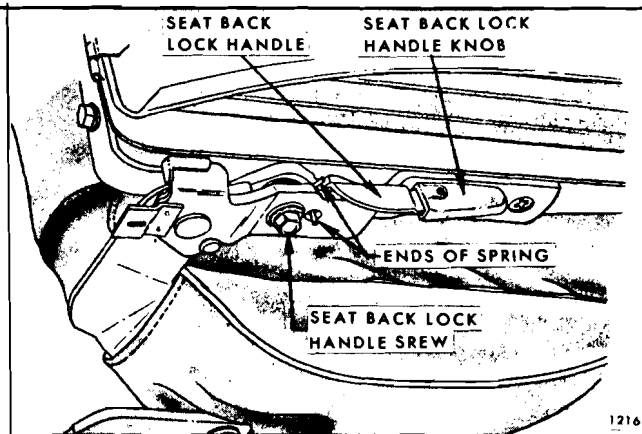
Seat Back Lock (Vista Cruiser and Sport Wagon Styles)
